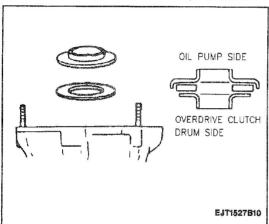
Installing Overdrive Clutch Drum Bearing and Race
